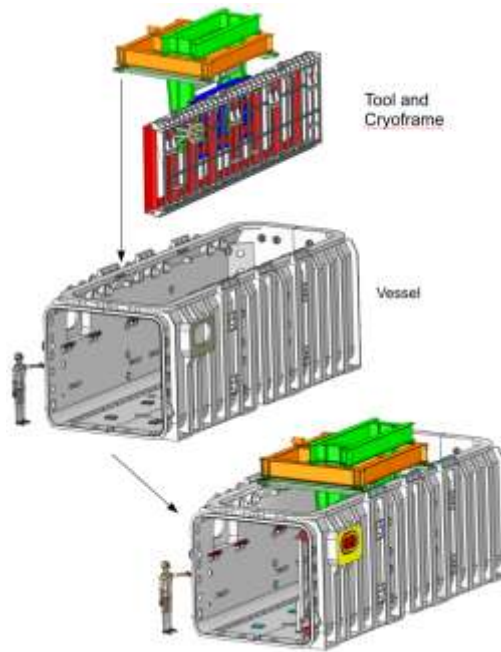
CAD view of the MITICA Cryogenic Pumps Assembly Tool
